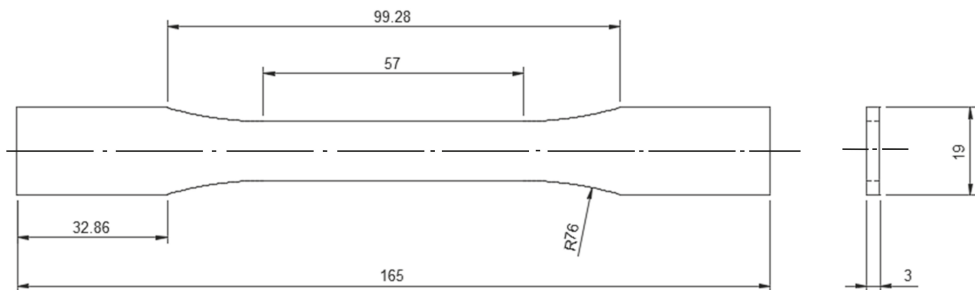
ASTM D638 specimen for tensile testing (all dimensions are in mm) [22].
